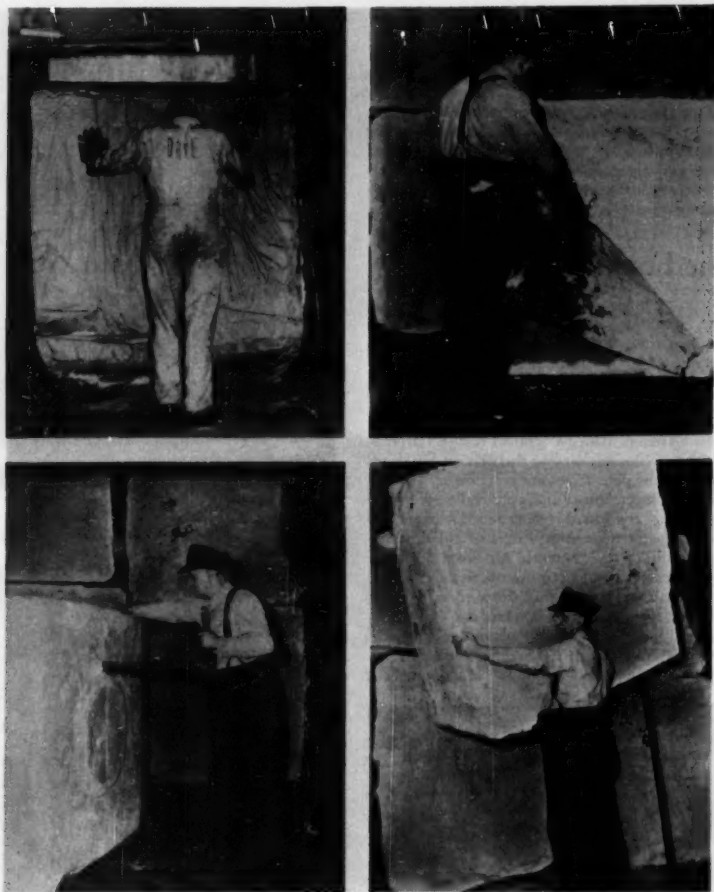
FOAMED PHENOLIC RESIN PACKAGING MATERIAL REDUCES BREAKAGE, PACKAGING, AND SHIPPING COSTS
